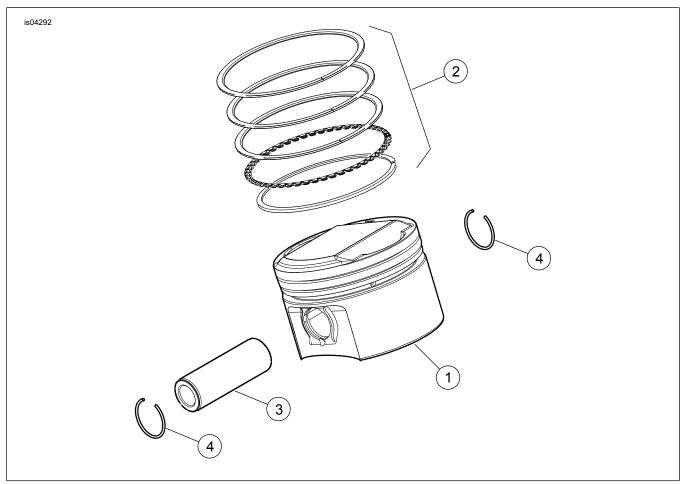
Service Parts: XL 1200 cc High Compression Piston Kits
